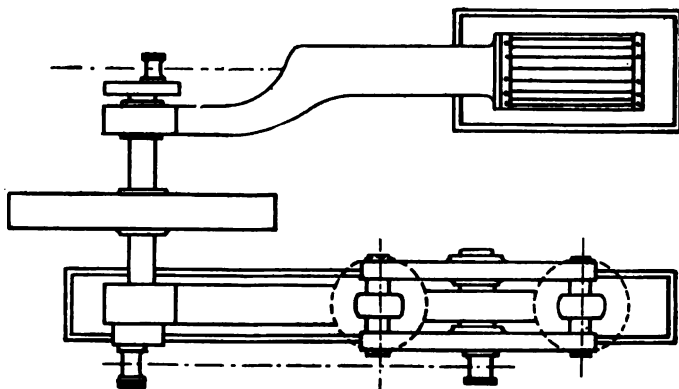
PLAN OF HERCULES MACHINE AND STEAM ENGINE.
